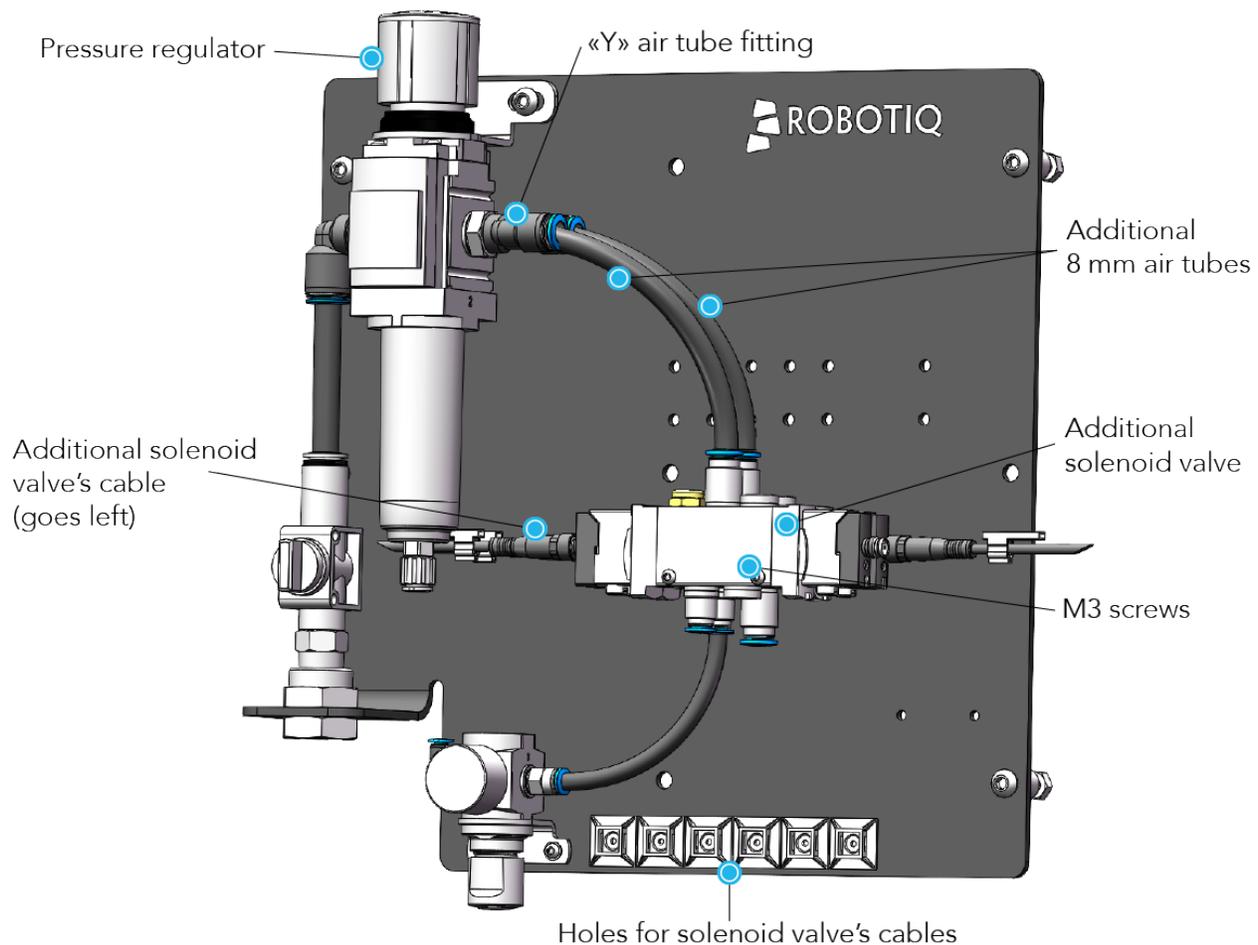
Assembling the pneumatic components for the Foot Switch Activator 1
